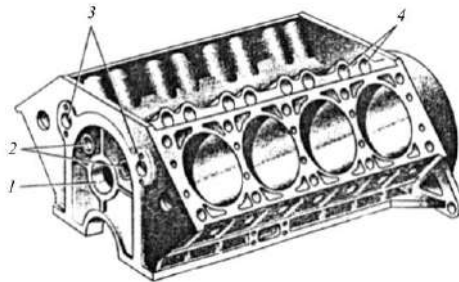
Traditional V-shaped ICE cylinder block: 1– camshaft bearing; 2- longitudinal oil plug caps channels; 3- cooling system openings; 4- holes for parts gas distribution mechanism
